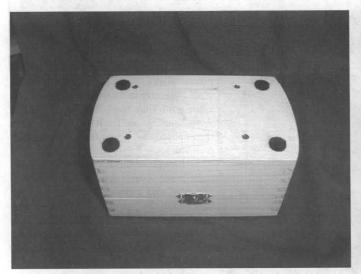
Felt pads cover the mounting holes for the panel standoffs. Countersunk holes for PC board spacers are visible.
